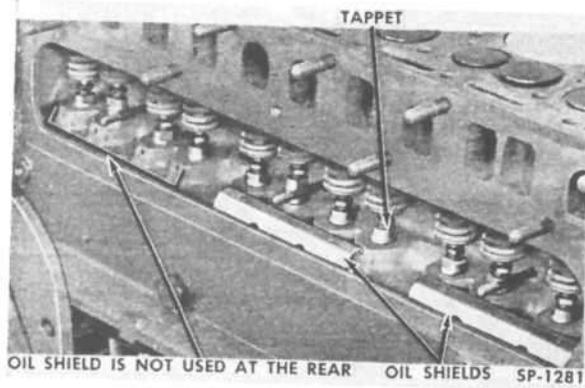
VALVE TAPPET CHAMBER, TAPPETS AND OIL SHIELDS
